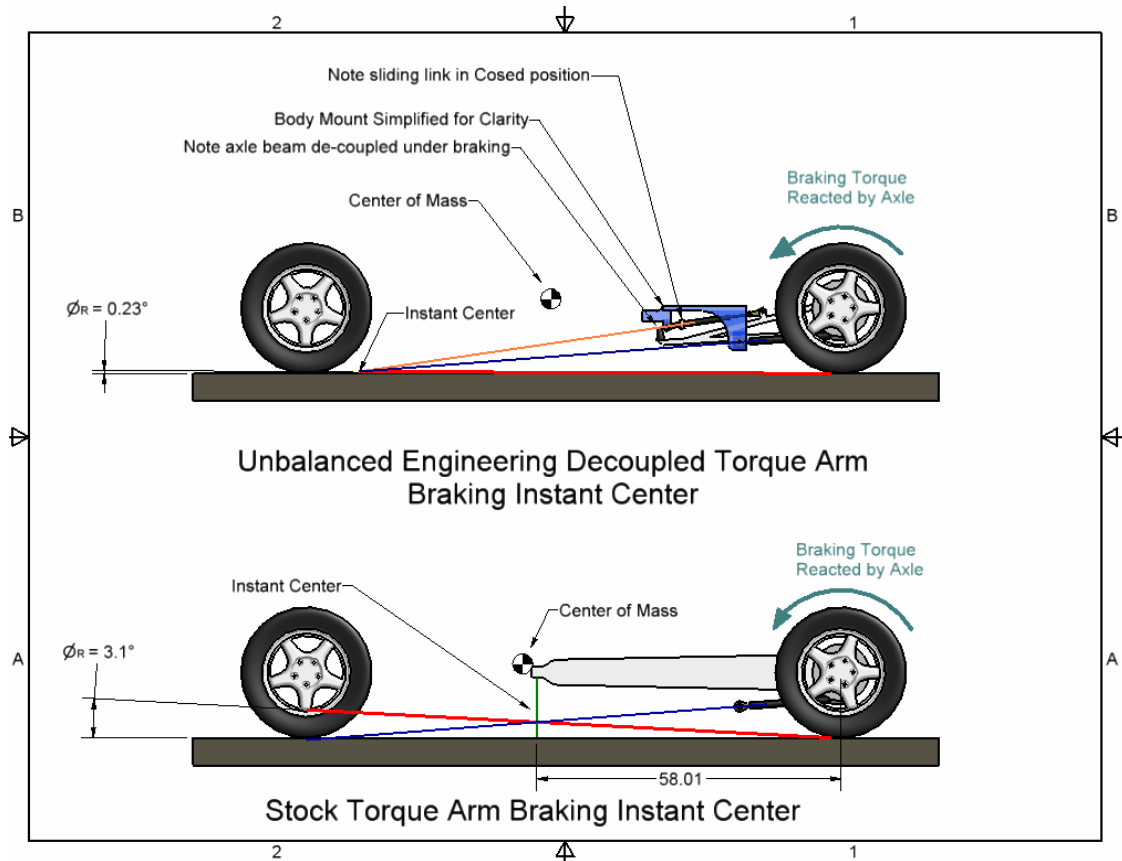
Unbalanced Engineering Decoupled Torque Arm Vs. Stock Torque Arm Under Braking
